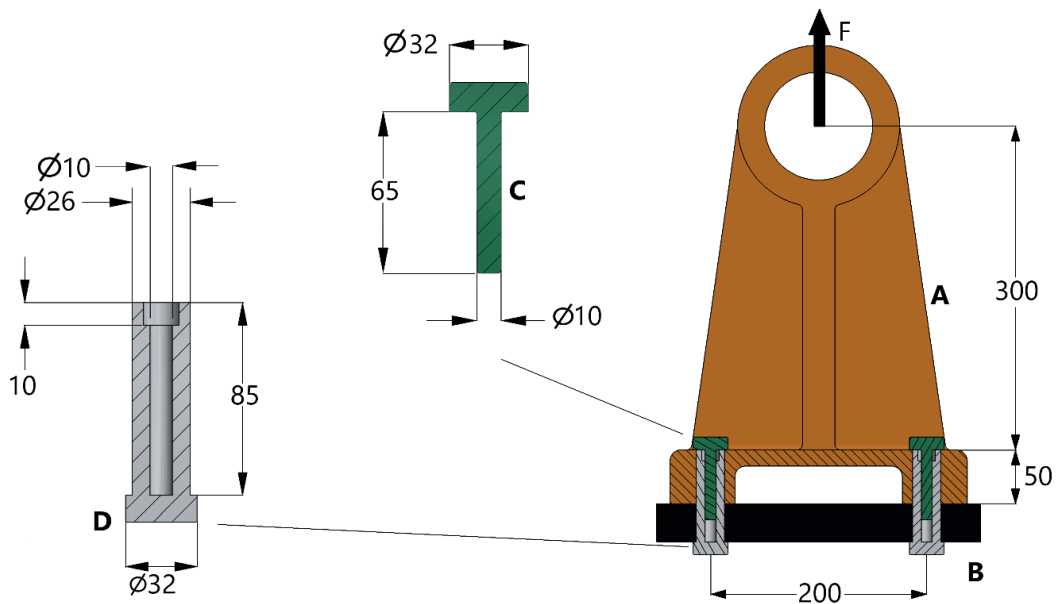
Technical drawings of shaft support block and tailored bipartite pins
